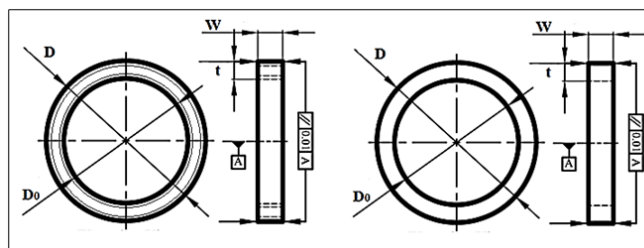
Specimens of Nol Ring test: unwelded and welded.
